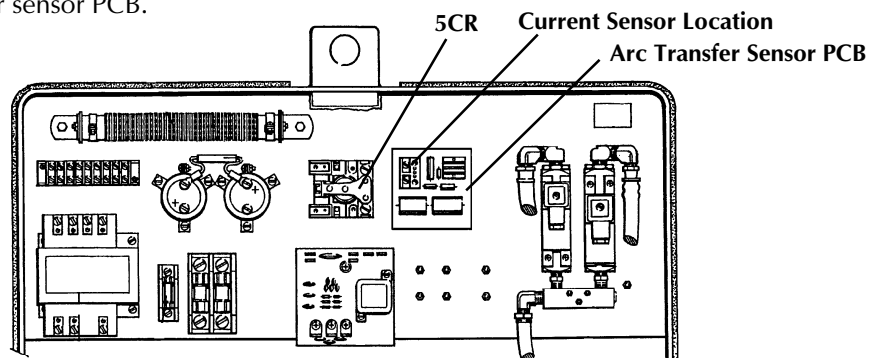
HT400 Center Bail and Location of Arc Transfer Sensor PCB
